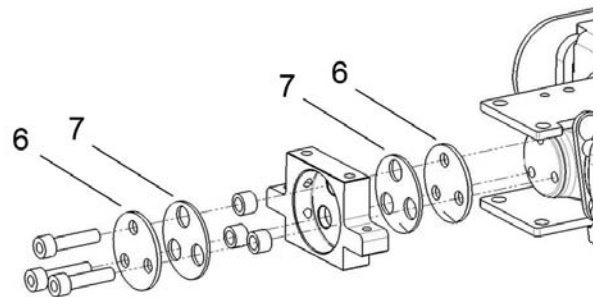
Remove the three screws holding the actuator's washers and dampers.
